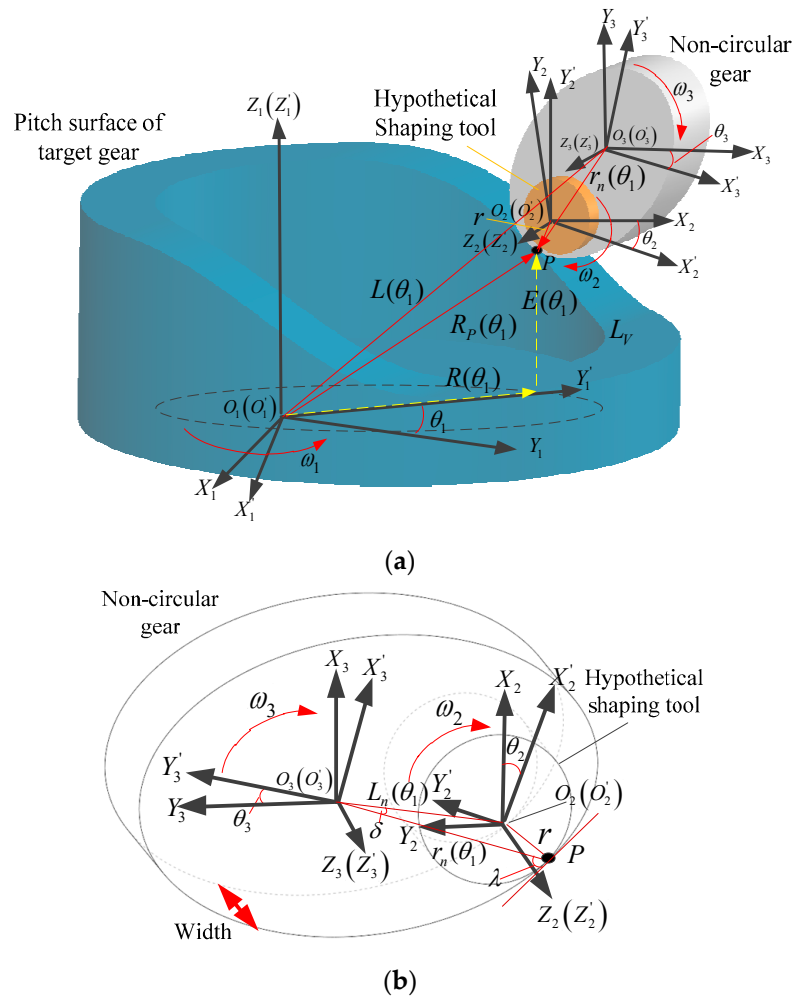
Engaged tooth surface of eccentric curve-face gear. (a) Conjugate meshing of the three gears; (b) relationship between non-circular gear and shaping tool.
